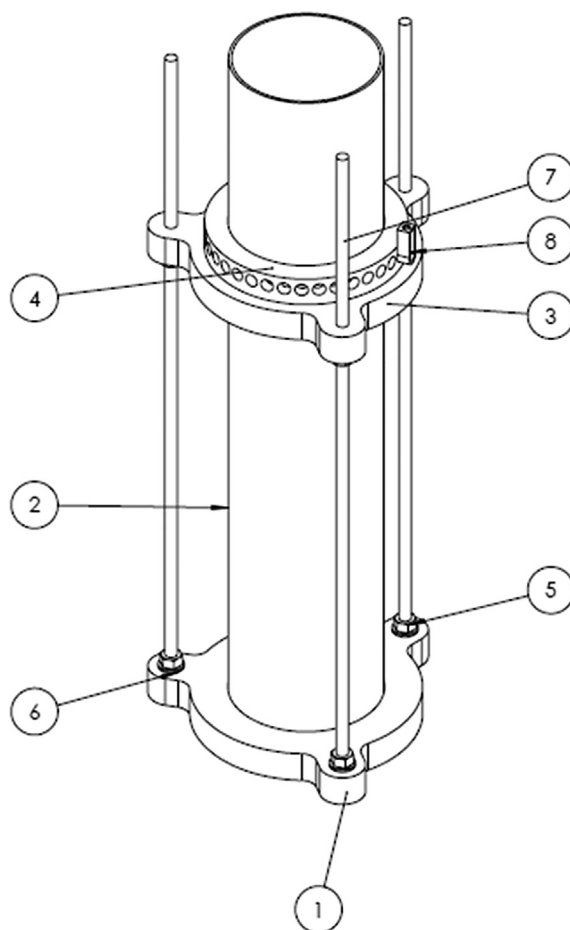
TARDIIS assembly drawing. #1) Base. #2) Tube (sample cell). #3) Sensor collar. #4) Sensor ring. #5) M8 nut. #6) M8 washer. #7) Threaded rod. #8) Amplifier housing.
